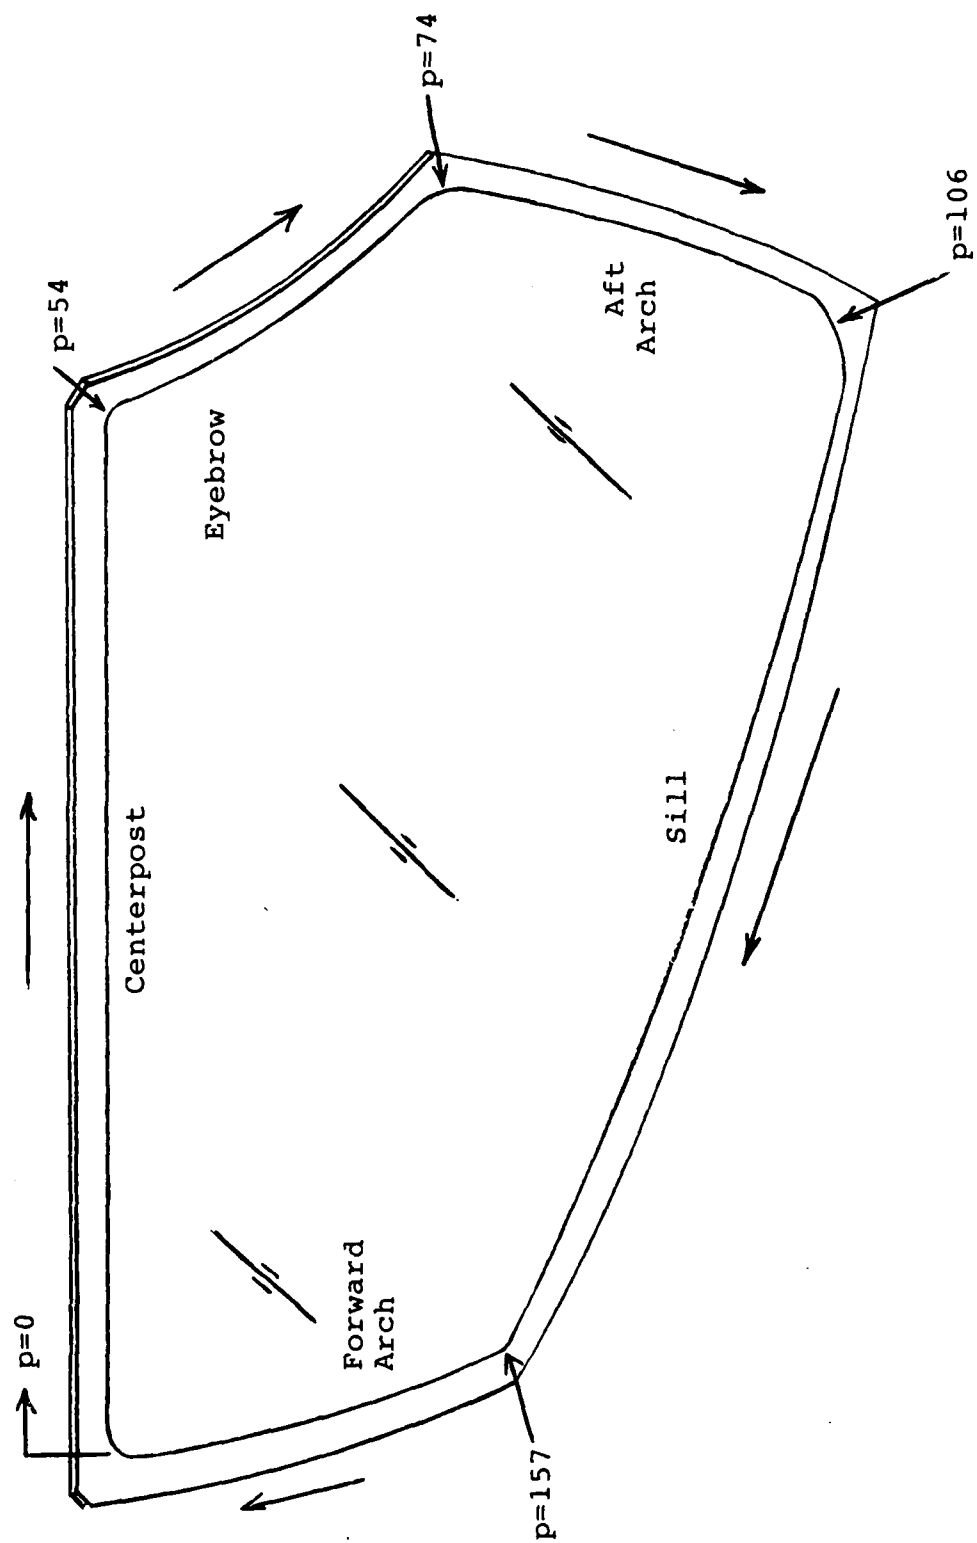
Windshield Perimeter Location System for Fastener Analysis.
